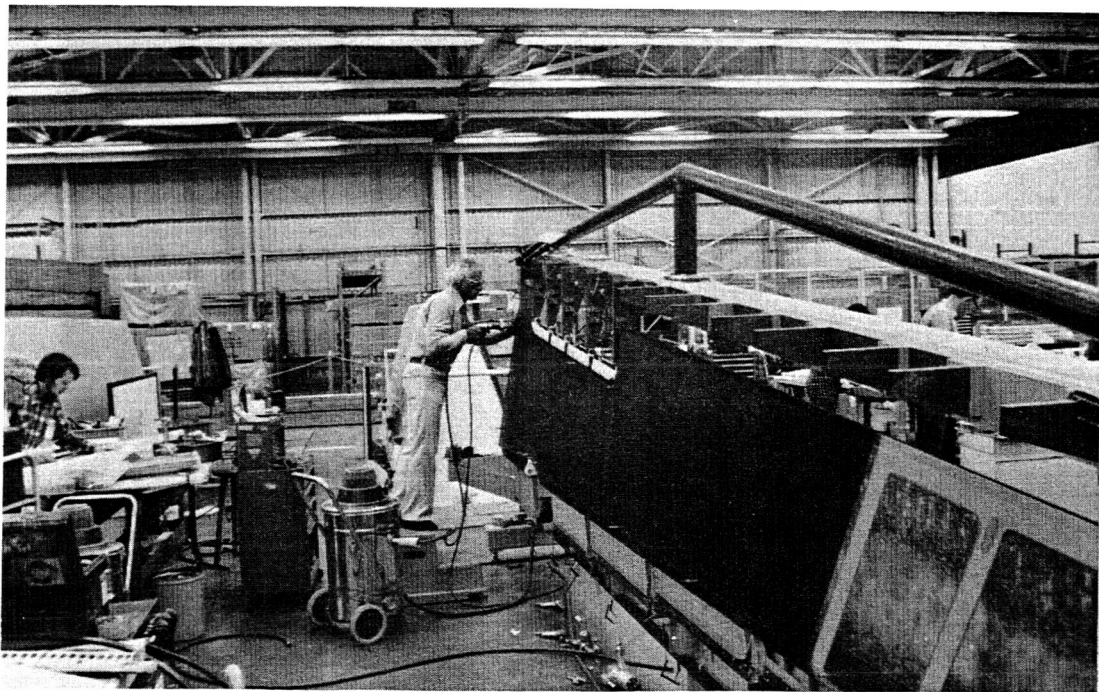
Elevator Assembly Showing Vacuum System Used for Dust Collection
